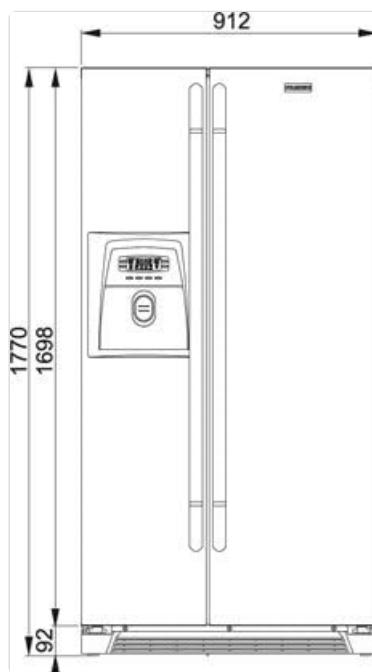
Dimensional drawing of the refrigerator, indicating a width of 912mm, height of 1770mm, and a base height of 92mm. These dimensions are crucial for proper installation and clearance.
